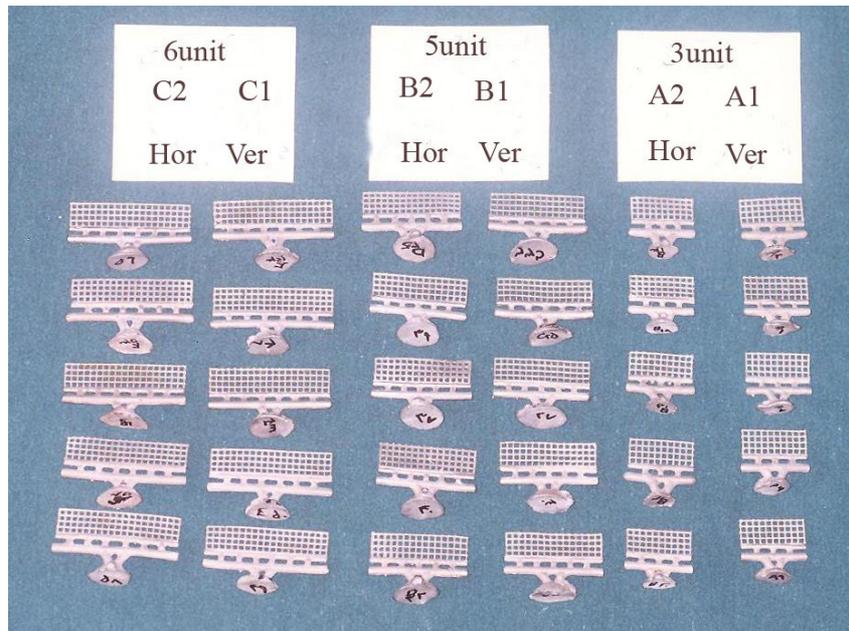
Casted bridge specimens in vertical and horizontal situation after sandblasting
